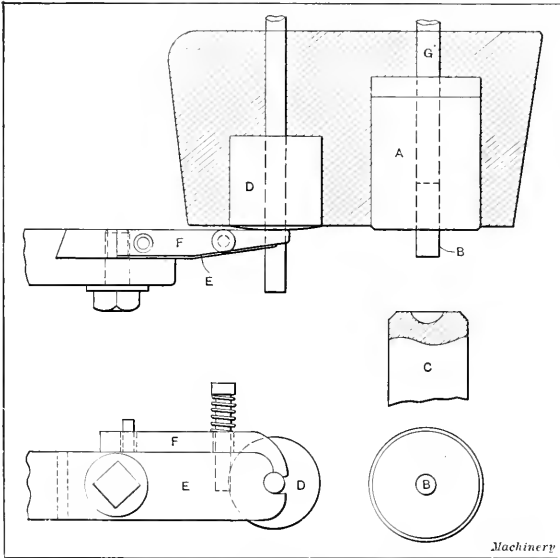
Section of Cold-header showing Locations of Principal Tools
